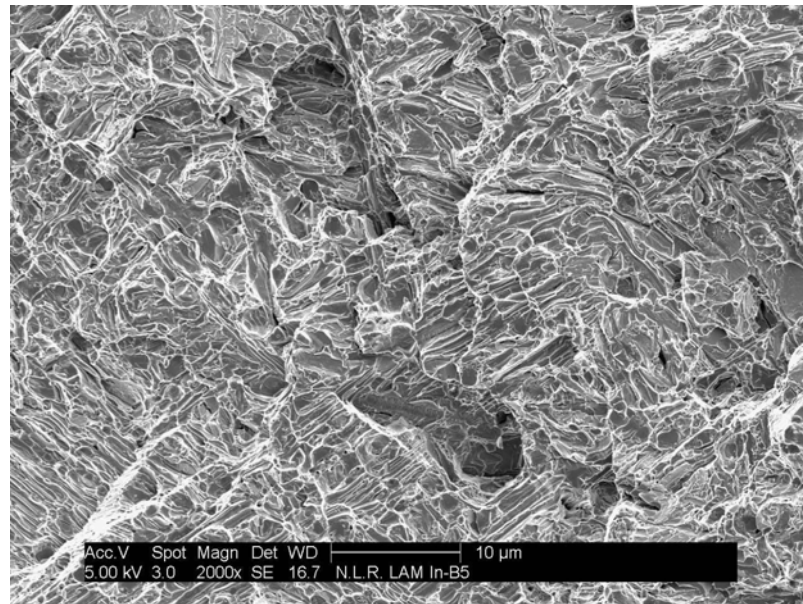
Fracture surface of a flat Inconel IN-B5 sample. The fracture surface shows fractured needles markings.
